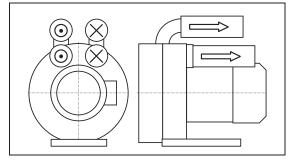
2BH1840-7L... (two-impeller pump-motor unit with double-flow design)
